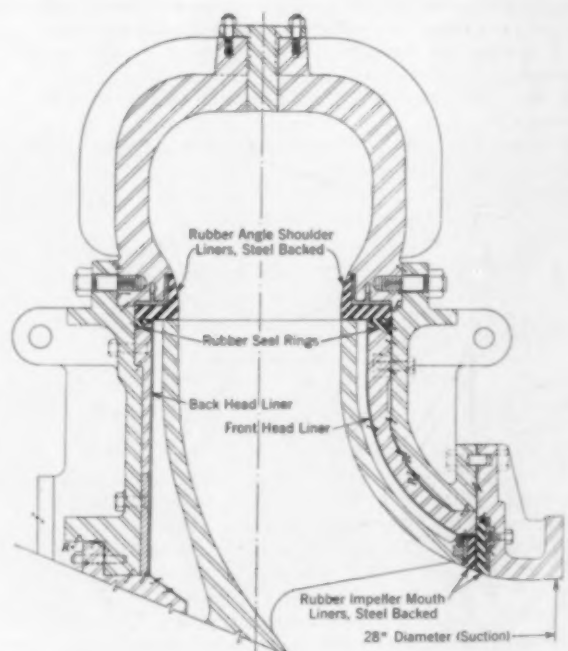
SECTION THROUGH PUMP SHOWING RUBBER ANGLE SHOULDER LINERS, STEEL BACKED, WITH RUBBER SEAL RINGS
